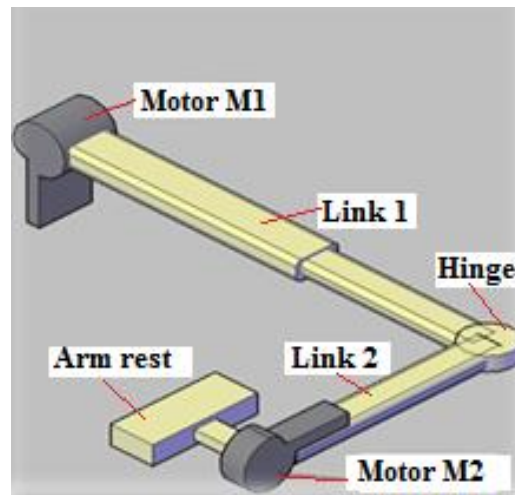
CATIA Model of the Shoulder Arm with Motor M_1 and M_2
